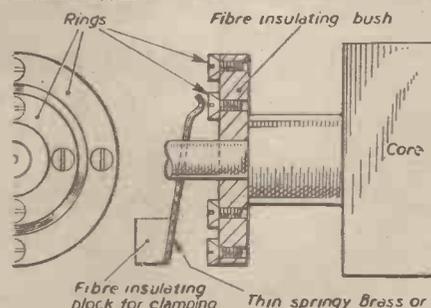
Mechanical assembly of slip-rings and brushes.
